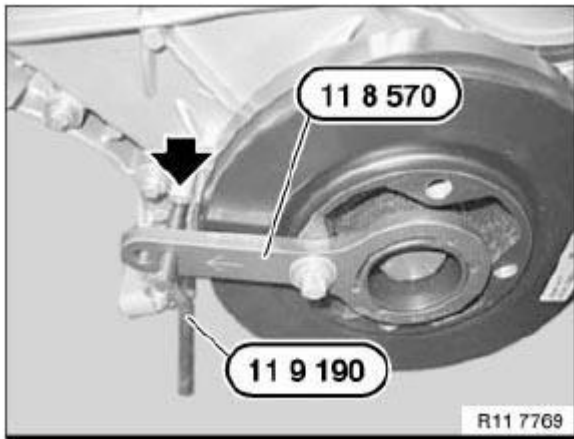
Identifying Special Tools Position (11 8 570 And 11 9 190)
